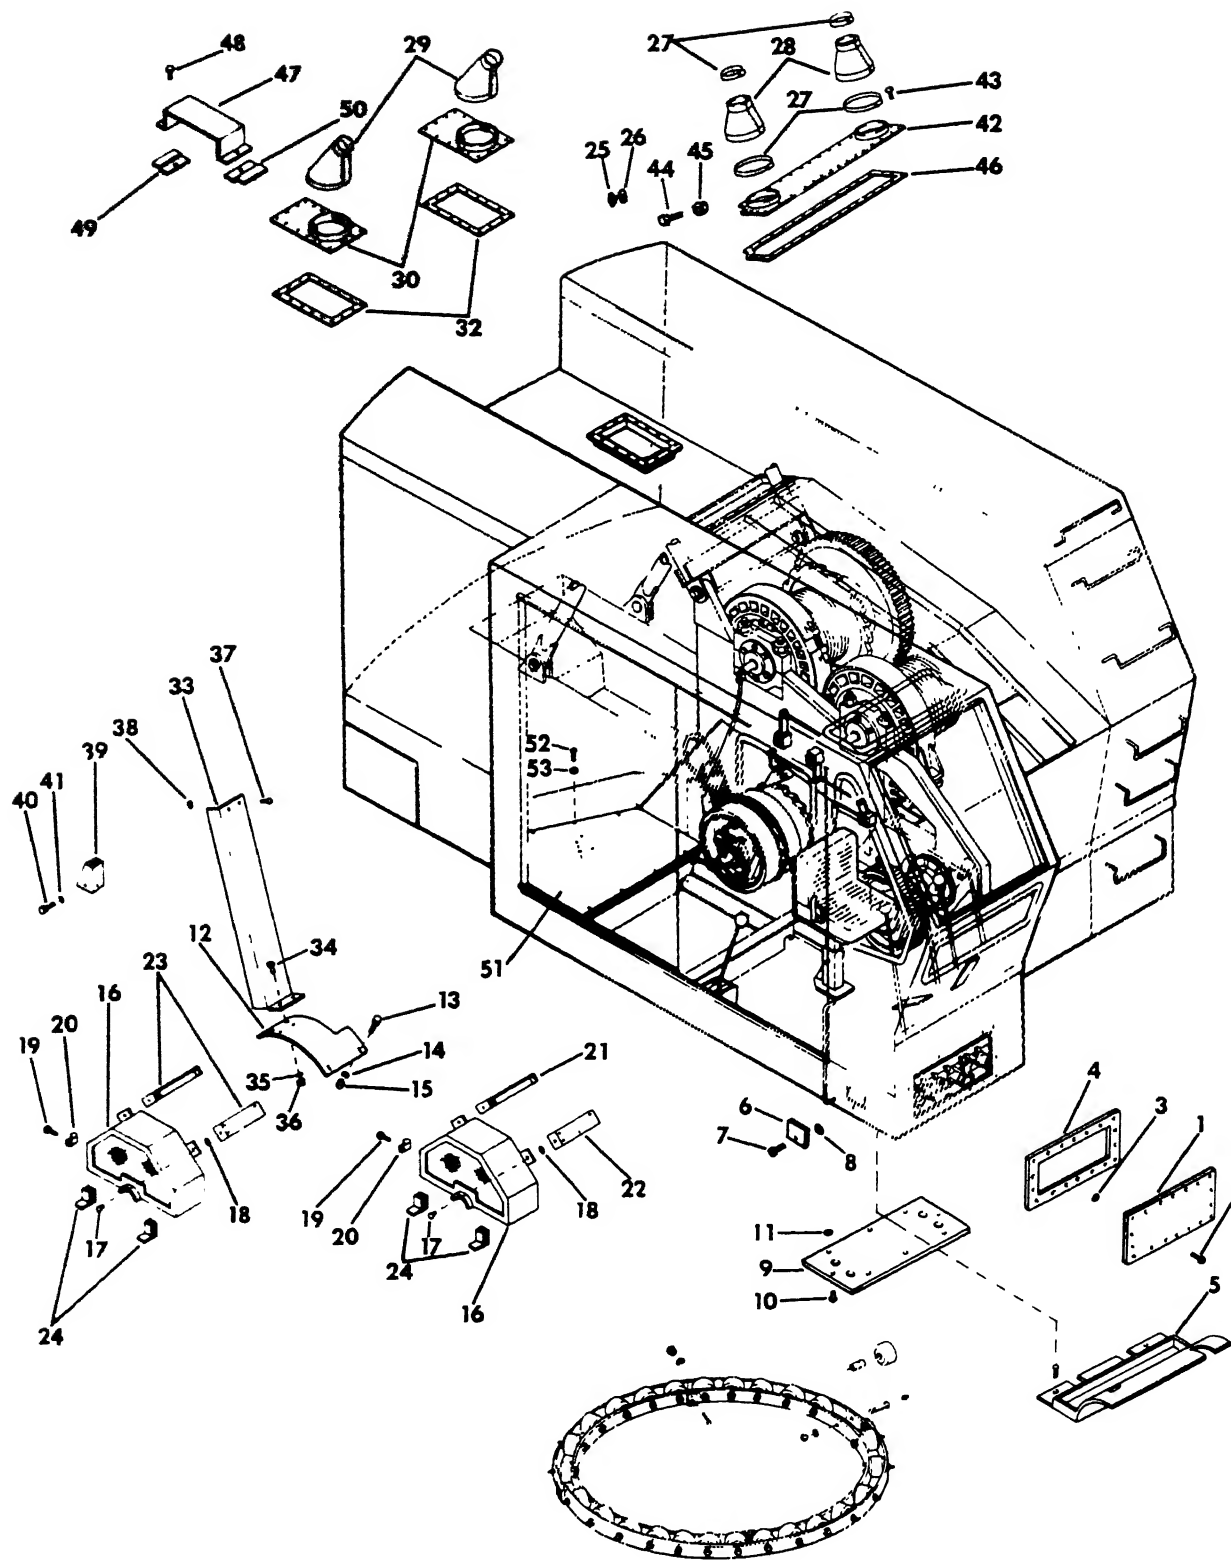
Cab sheet metal assembly, removal and replacement, (sheet 4 of 6).
